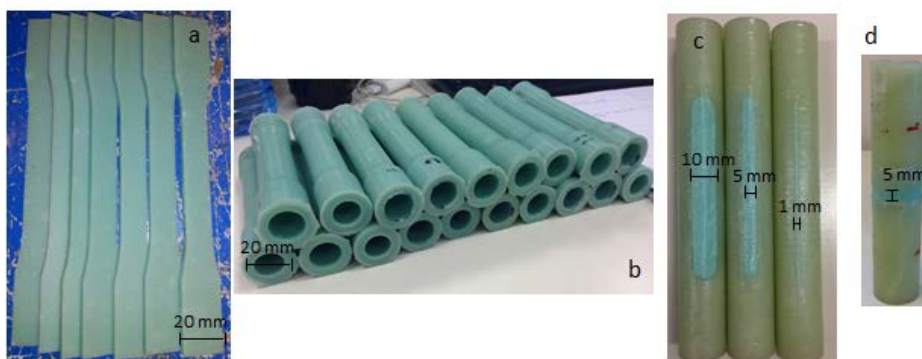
(a) dog-bone shape coupons; (b) hollow cylinder; (c) composite coupon; (d) butt-joint.
